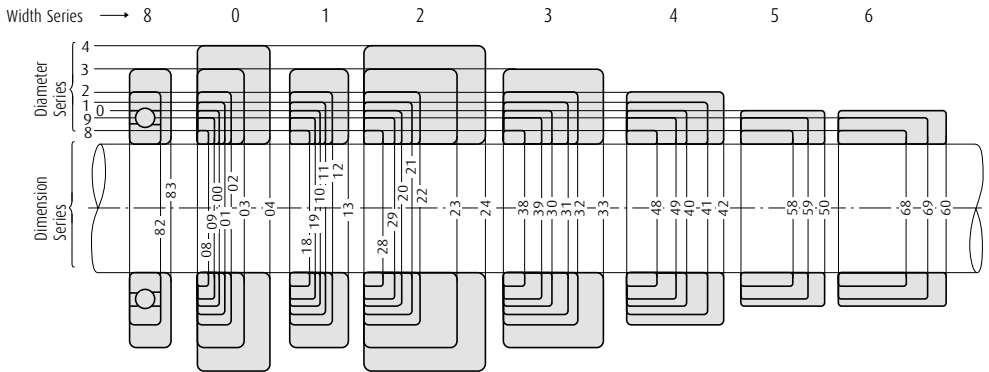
Comparison of Cross Sections of Radial Bearings (except Tapered Roller Bearings) for various Dimensional Series
